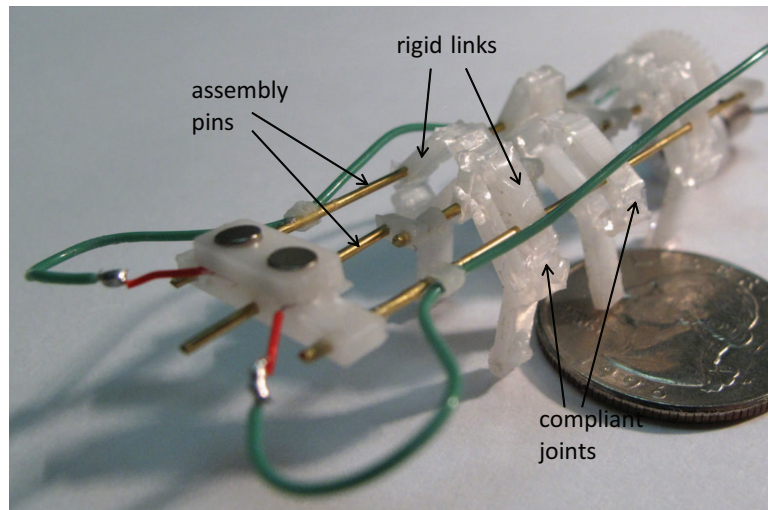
Hexapedal robot fabricated using LaCER and manual assembly onto a frame.
